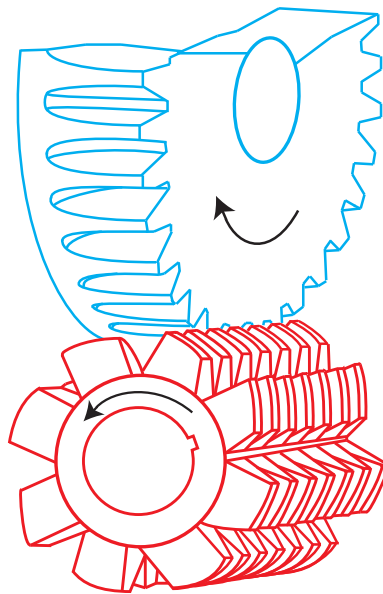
Hob and workpiece each rotate during the hobbing process. For a spur gear being cut with a single-start hob, the workpiece will advance one tooth for each revolution of the cutter.
